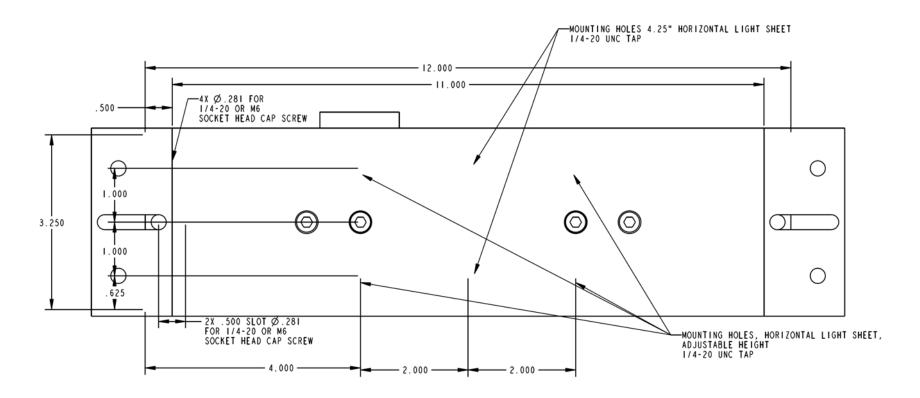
Light Sheet Collimator Base Plate Mounting Holes
